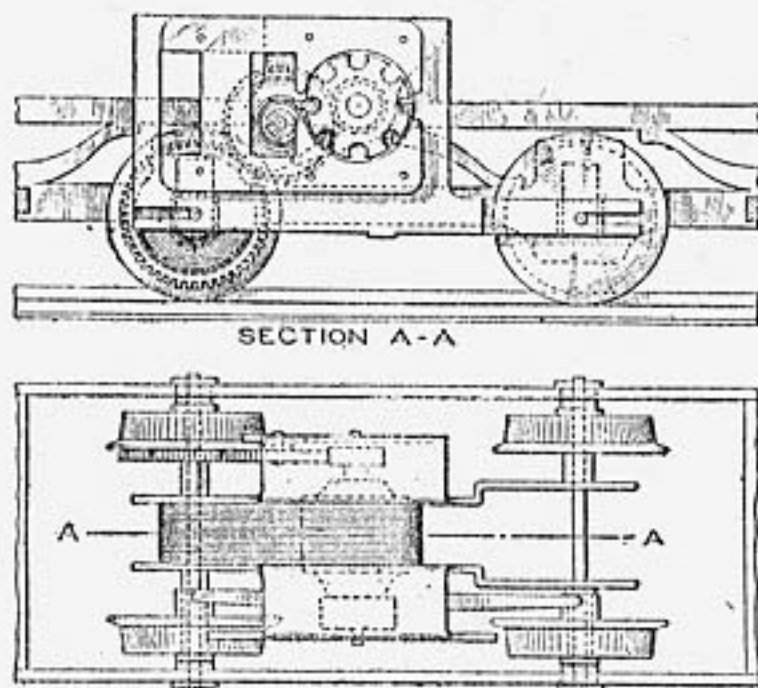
, Installation of the Motor, Showing Gears and Switch Contact Spring
